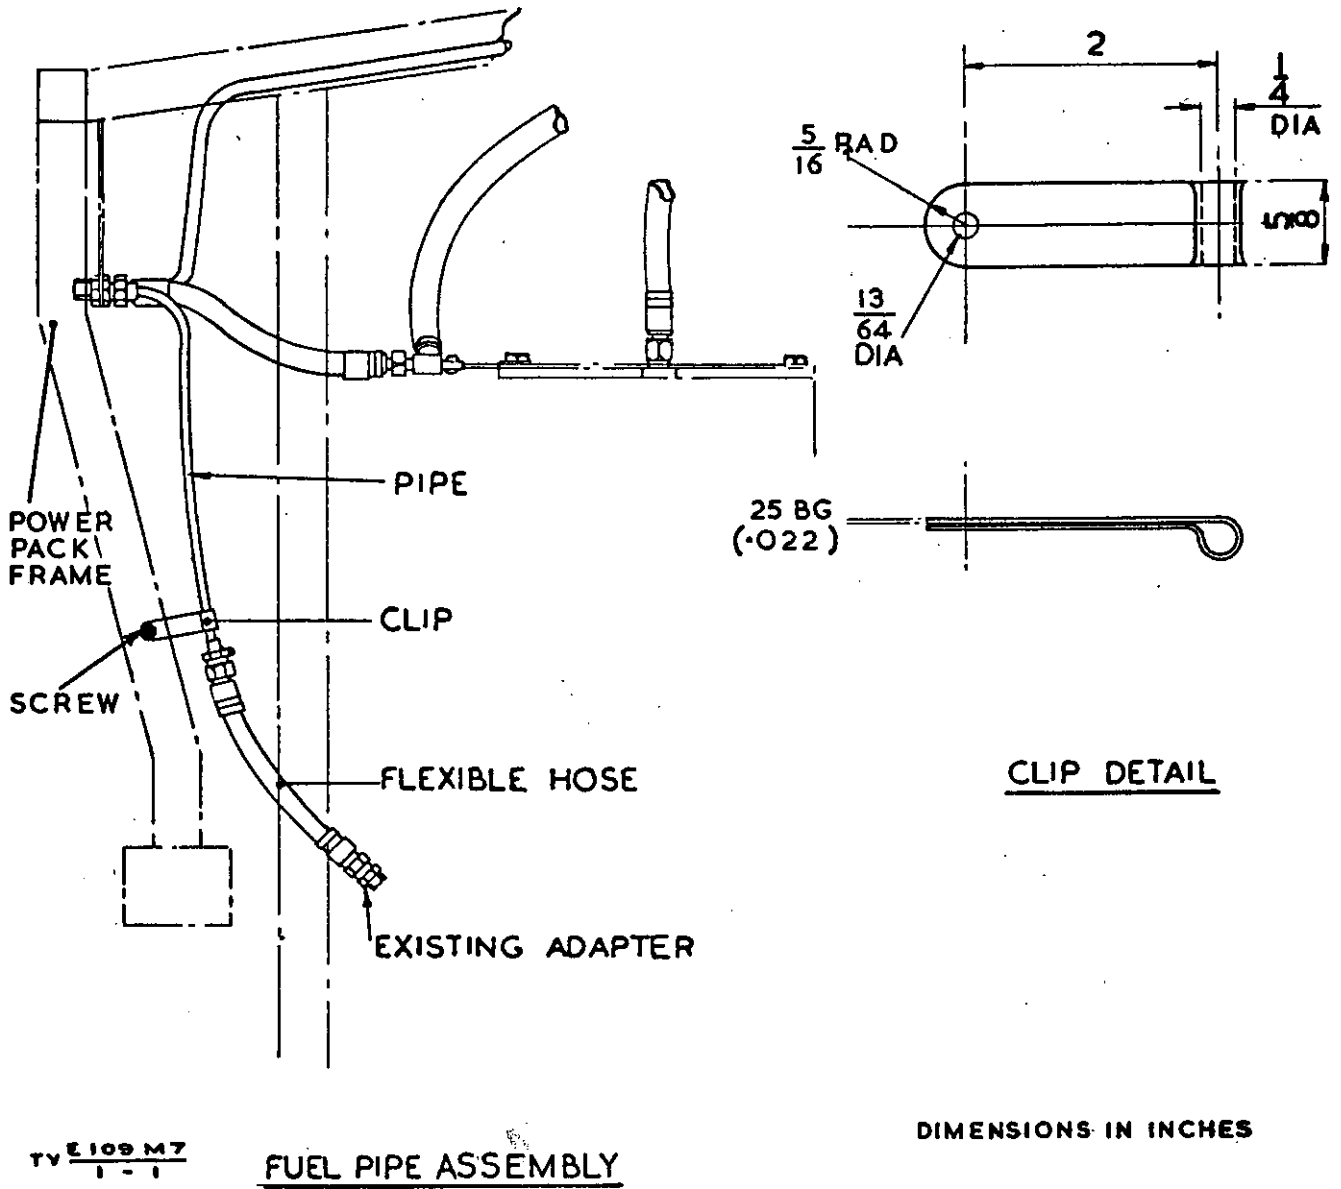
Fuel leak-off pipe - Assembly and clip details
